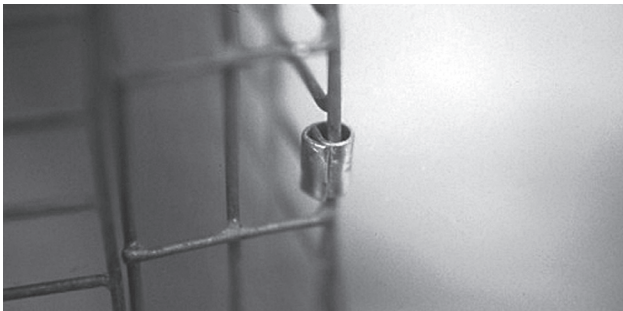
A J-clip that has been crimped around a piece of welded wire.
